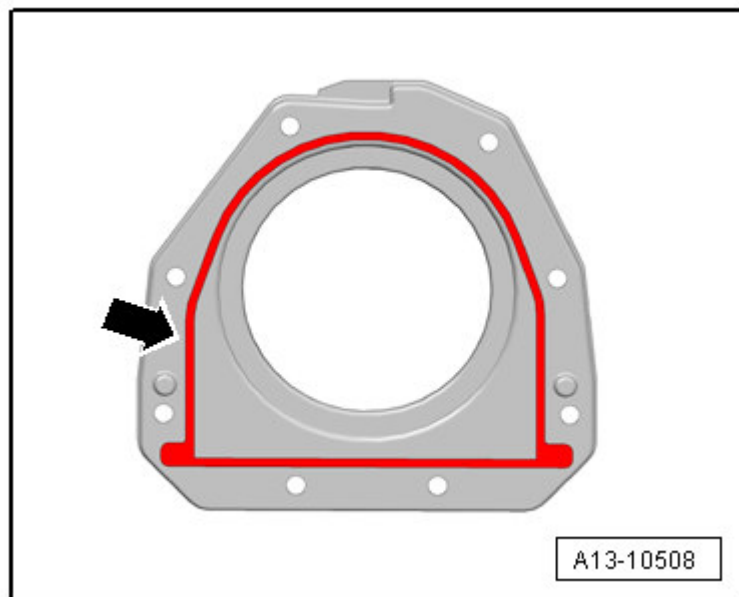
Identifying Silicone Sealant Applied On Cover Sealing Surface
